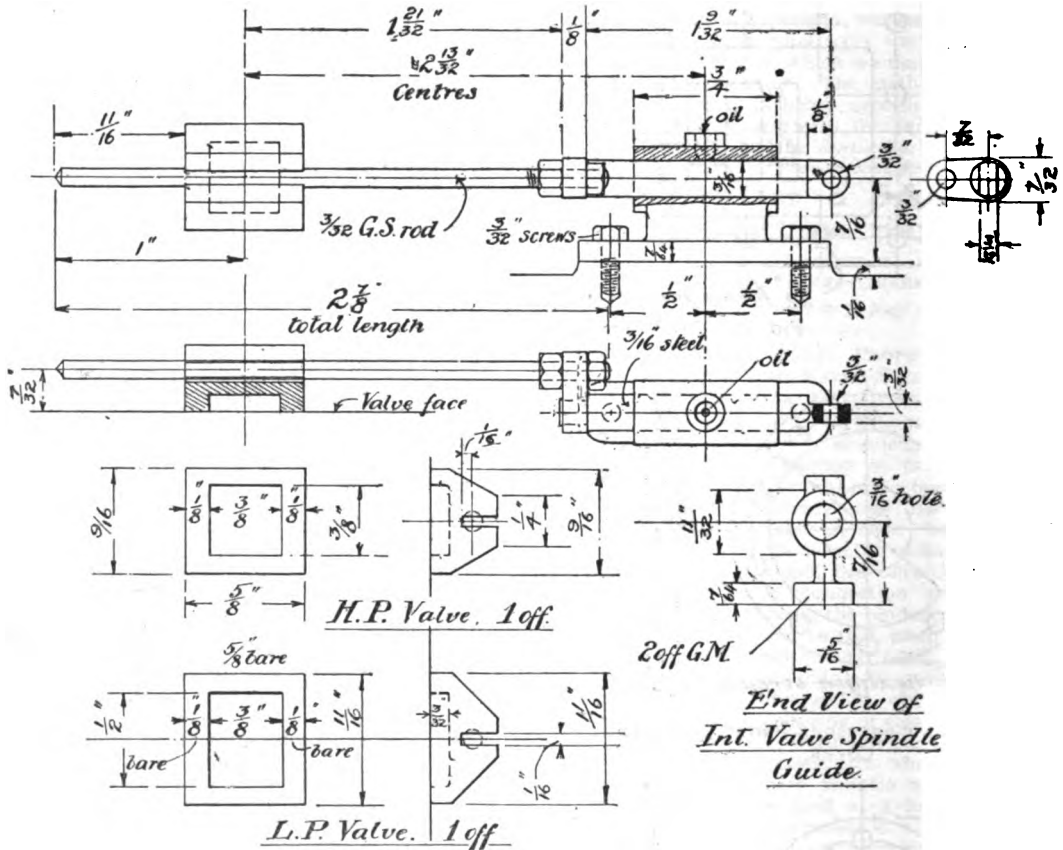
VALVES AND VALVE SPINDLES. (Full size.)
